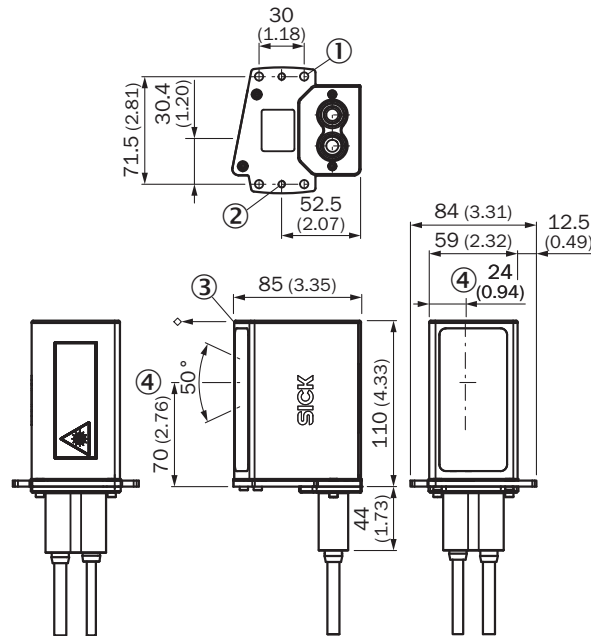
CLV63x / CLV64x: design and device dimensions of the IP69K protective housing with front reading window (dimensions in mm or inch)
